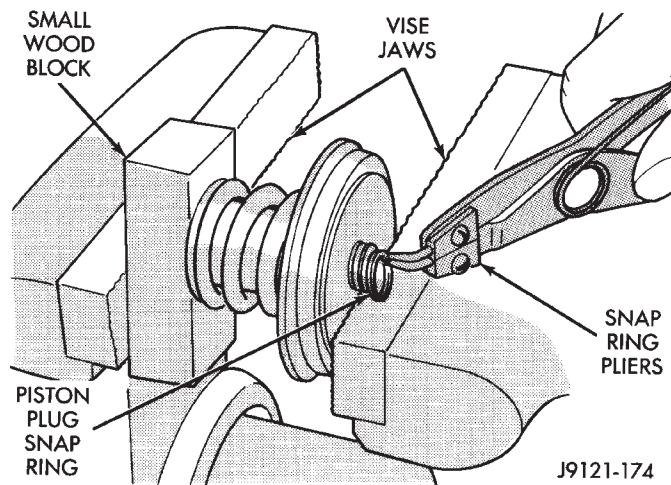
Removing/Installing Servo Piston Plug Snap Ring
